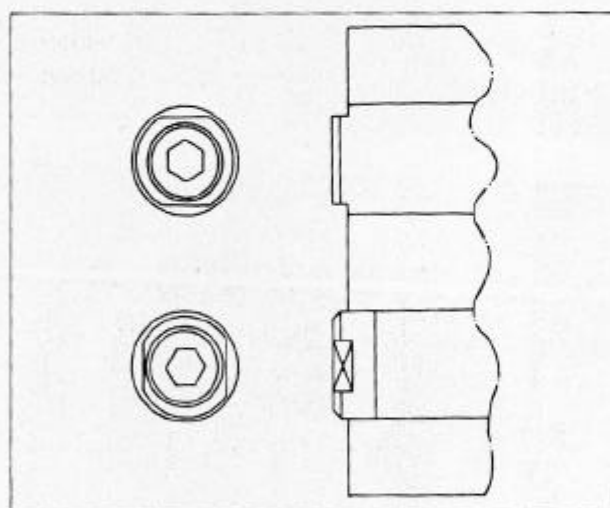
A - 72 INSTALLATION SIDES OF ROCKER ARMSHAFTS
